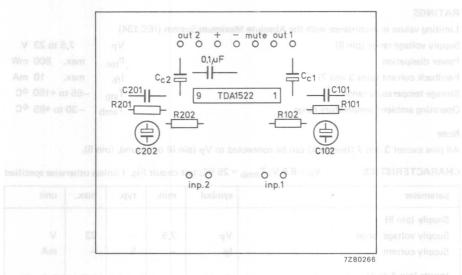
Printed-circuit board component side, showing component layout for circuit of Figure 1.
